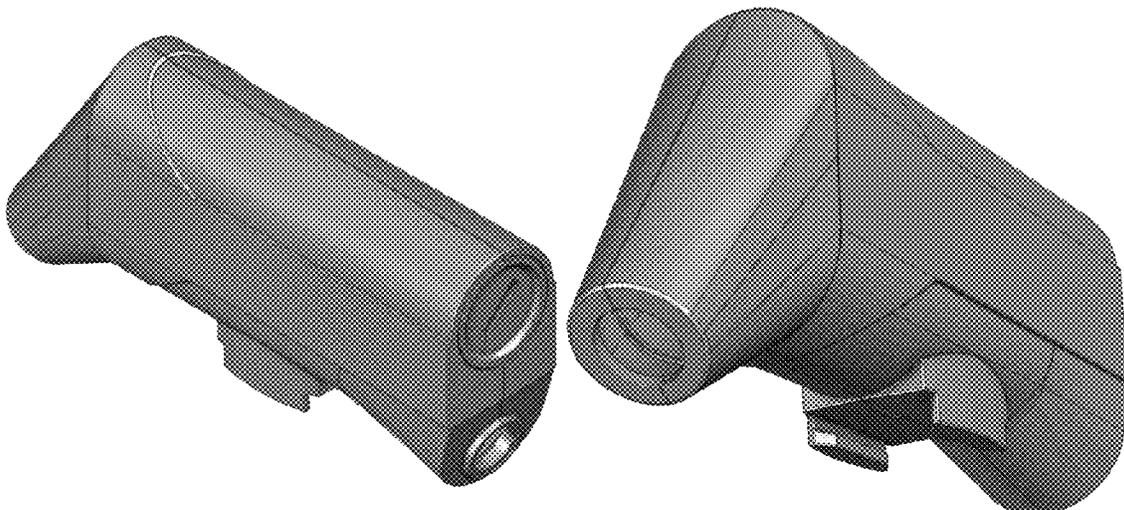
is a bottom-right front view of the probe head of FIG. 1.
